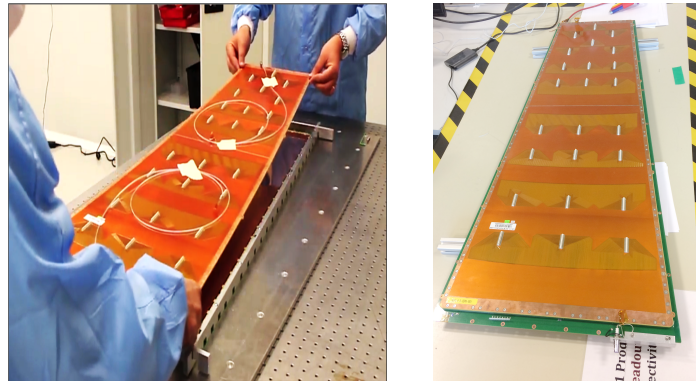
(left) Closing the chamber with the readout board. (right) A completed, closed GE1/1 chamber [17].
